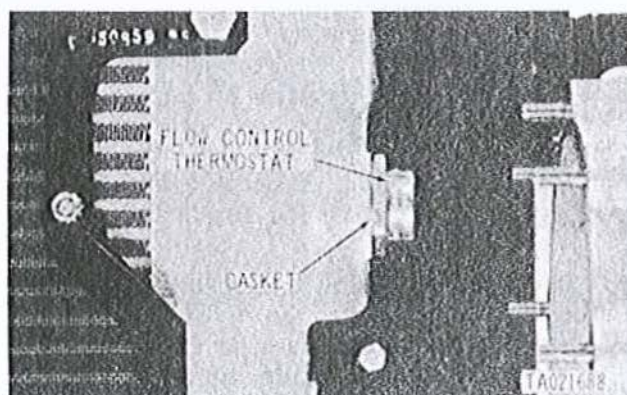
Removing or installing transmission oil cooler flow control thermostat.
